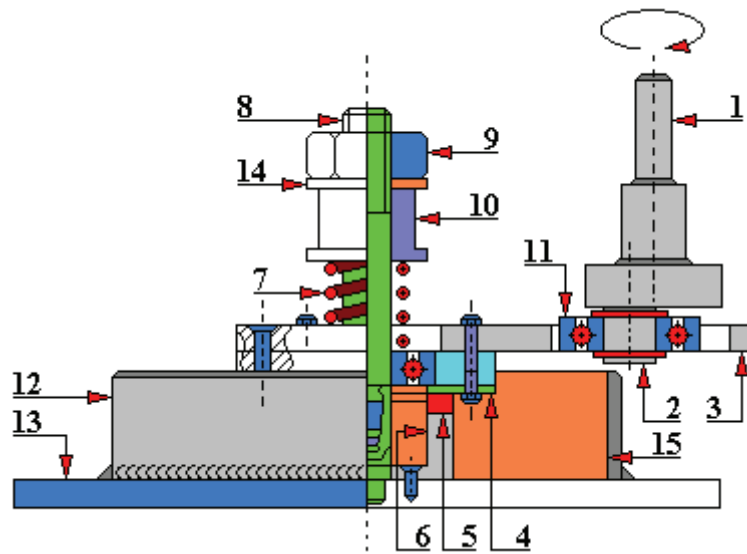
Structural form of the test rig. 1 – eccentric handle; 2 – eccentric; 3 – lever, 4 – counter-sample; 5 – tested samples, 6 – samples stabilizing bush; 7 – spring; 8 – central screw; 9 – nut; 10 – distance bush; 11 – single-row ball bearing; 12 – pipe jacket; 13 – steel plate of the base; 14 – washer; 15 – tested lubricating compound [own study]
